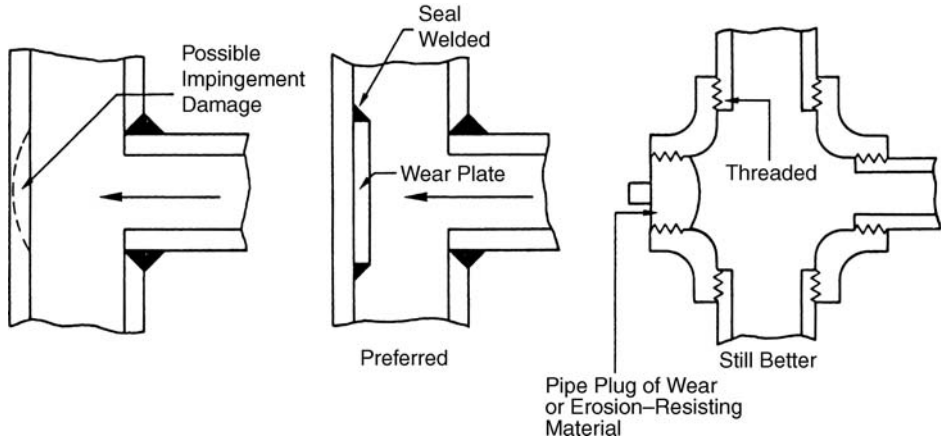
Wear-resisting designs to minimize corrosive wear
